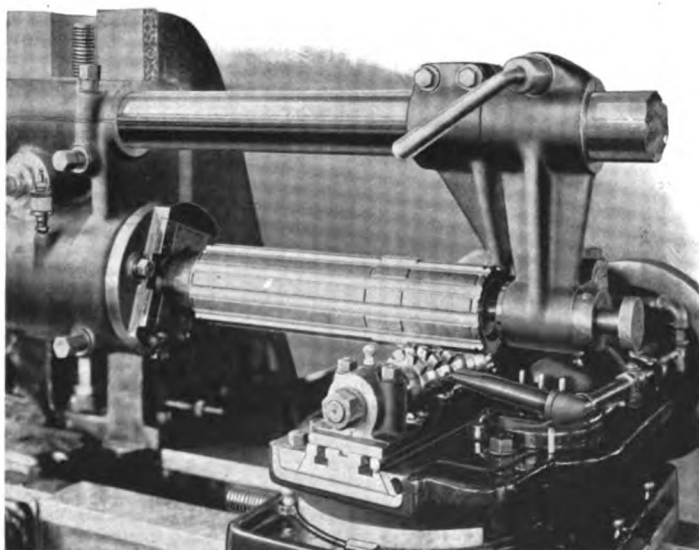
No. 12 Hobbing Machine—Floating Chuck Type
